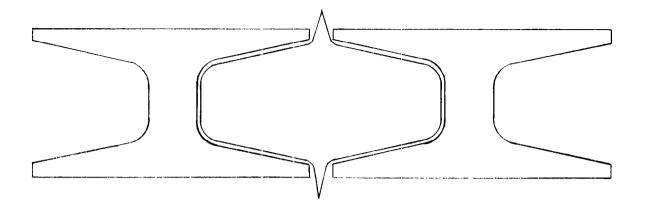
Crown Produced During Sizing of Sand Filled Chamber
